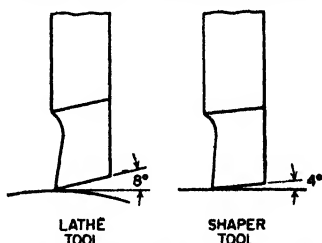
Comparison of front clearance angles of lathe and shaper tool bits.
